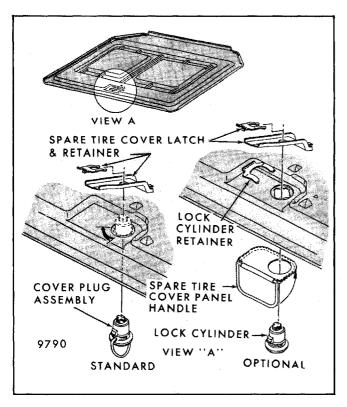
Spare Tire Cover Panel Lock Installation - A Styles
